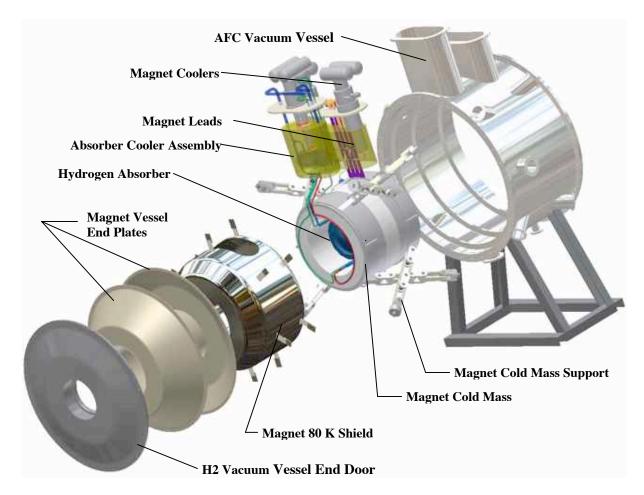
A schematic exploded view of the AFC module showing the magnet and the absorber.
